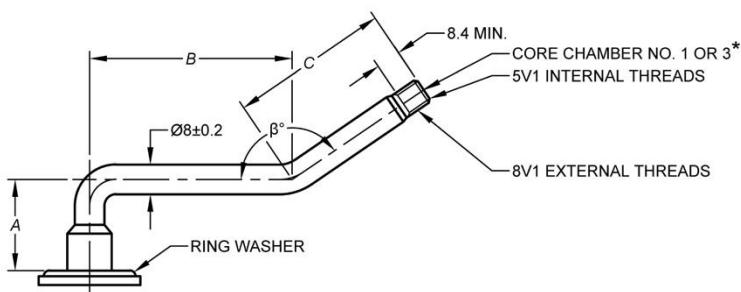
SCREW-ON UNIVERSAL TUBE VALVE SPUDS TRUCK AND BUS VALVE
